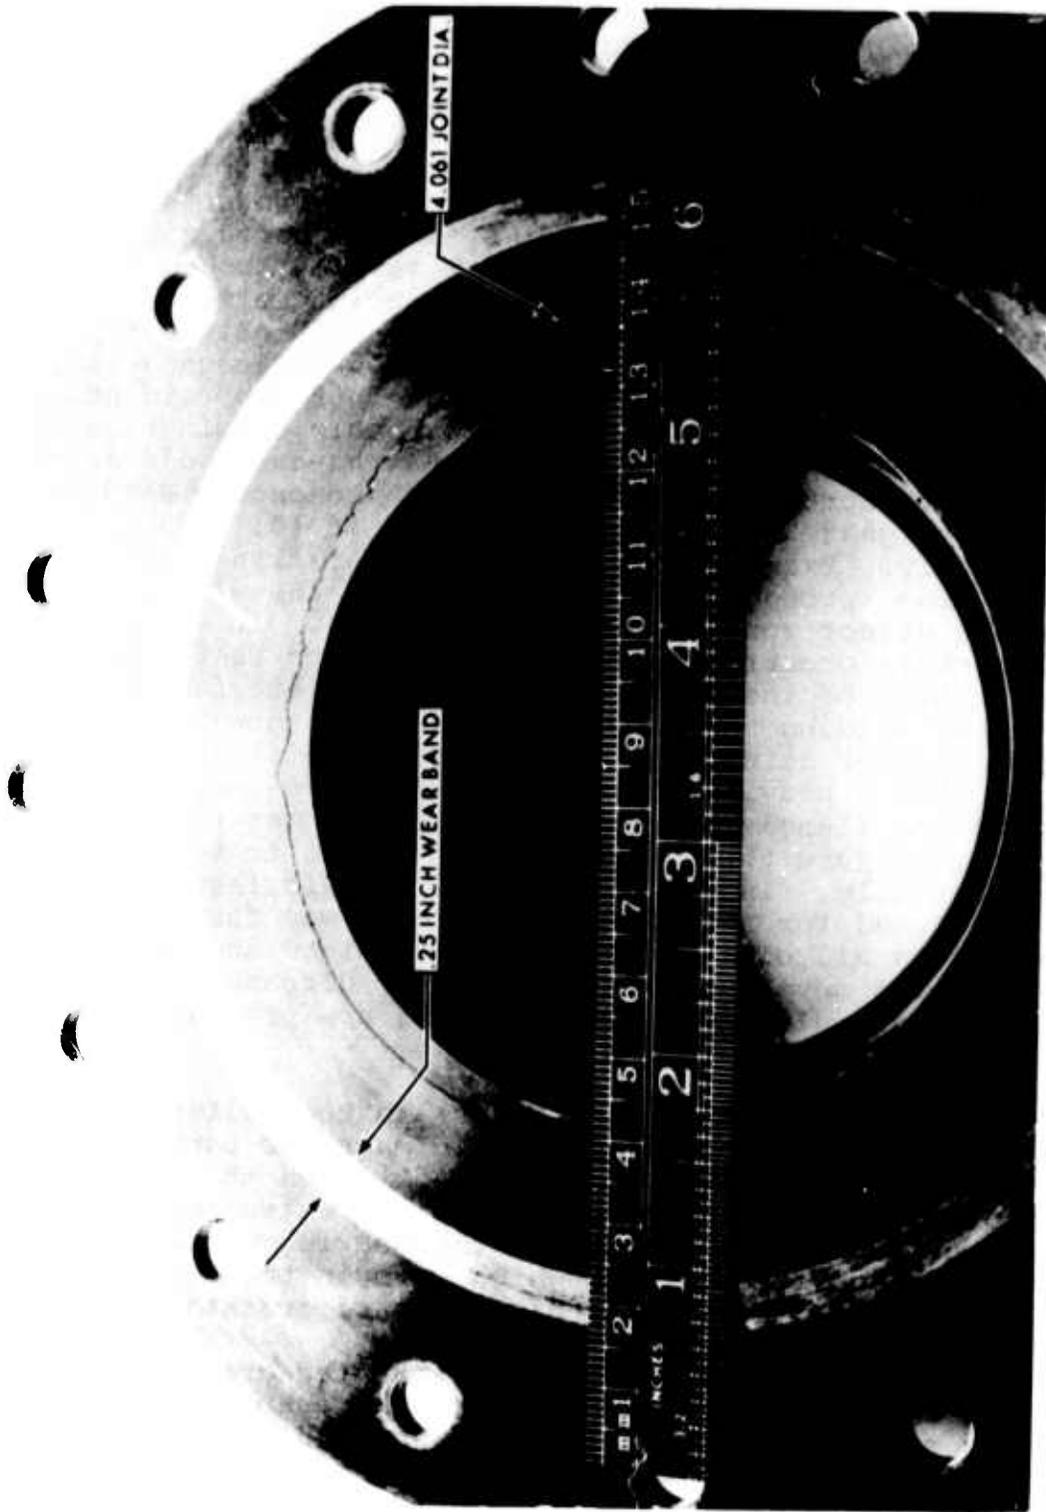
Second-Row Pinion Flange/Gear Weld Fracture.
